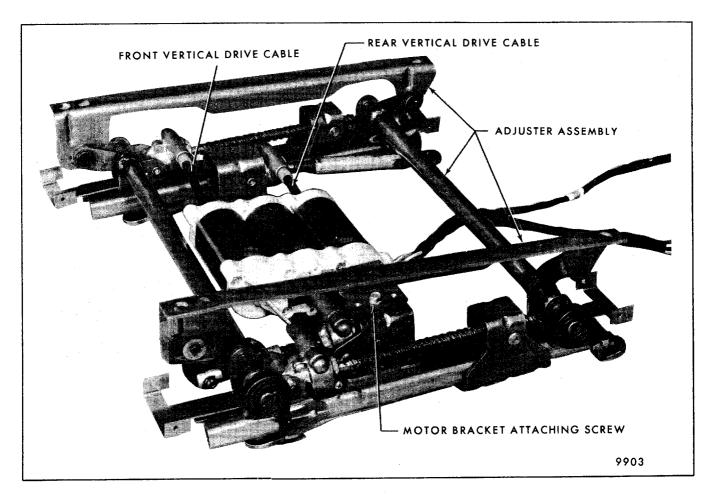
Six-Way Seat Adjuster Assembly - Cadillac 6CB69 Only
